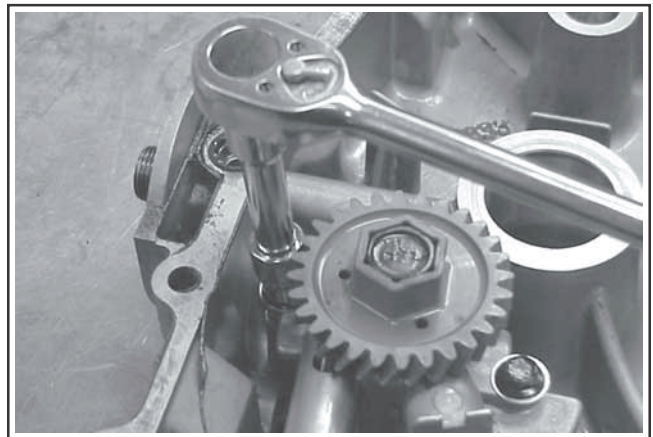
Governor Shaft Press Depth. Reassembly.
